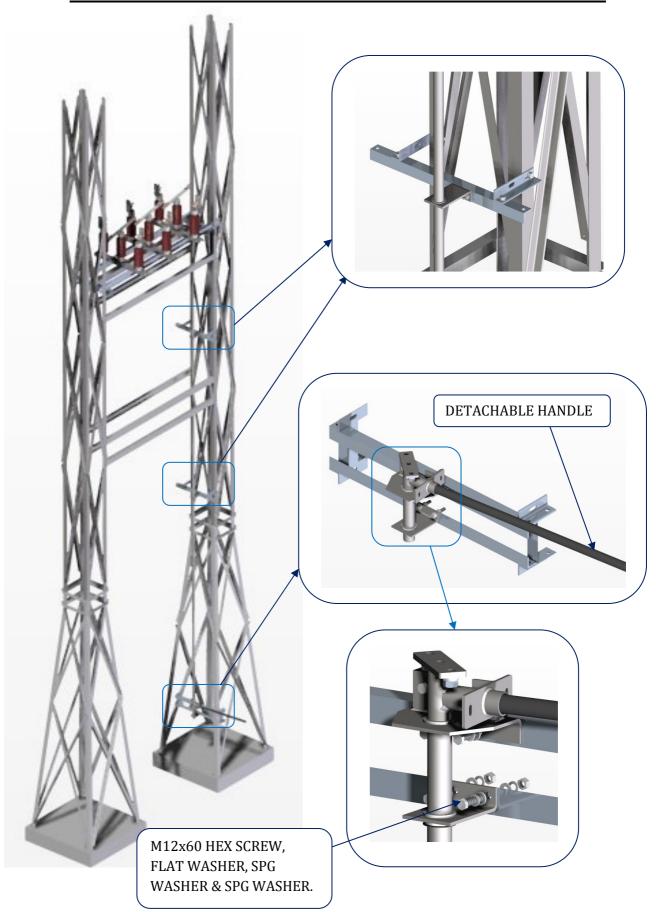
FIGURE – M DISCONNECTOR ASSEMBLY WITH OPERATING DRIVE MECHANISM
